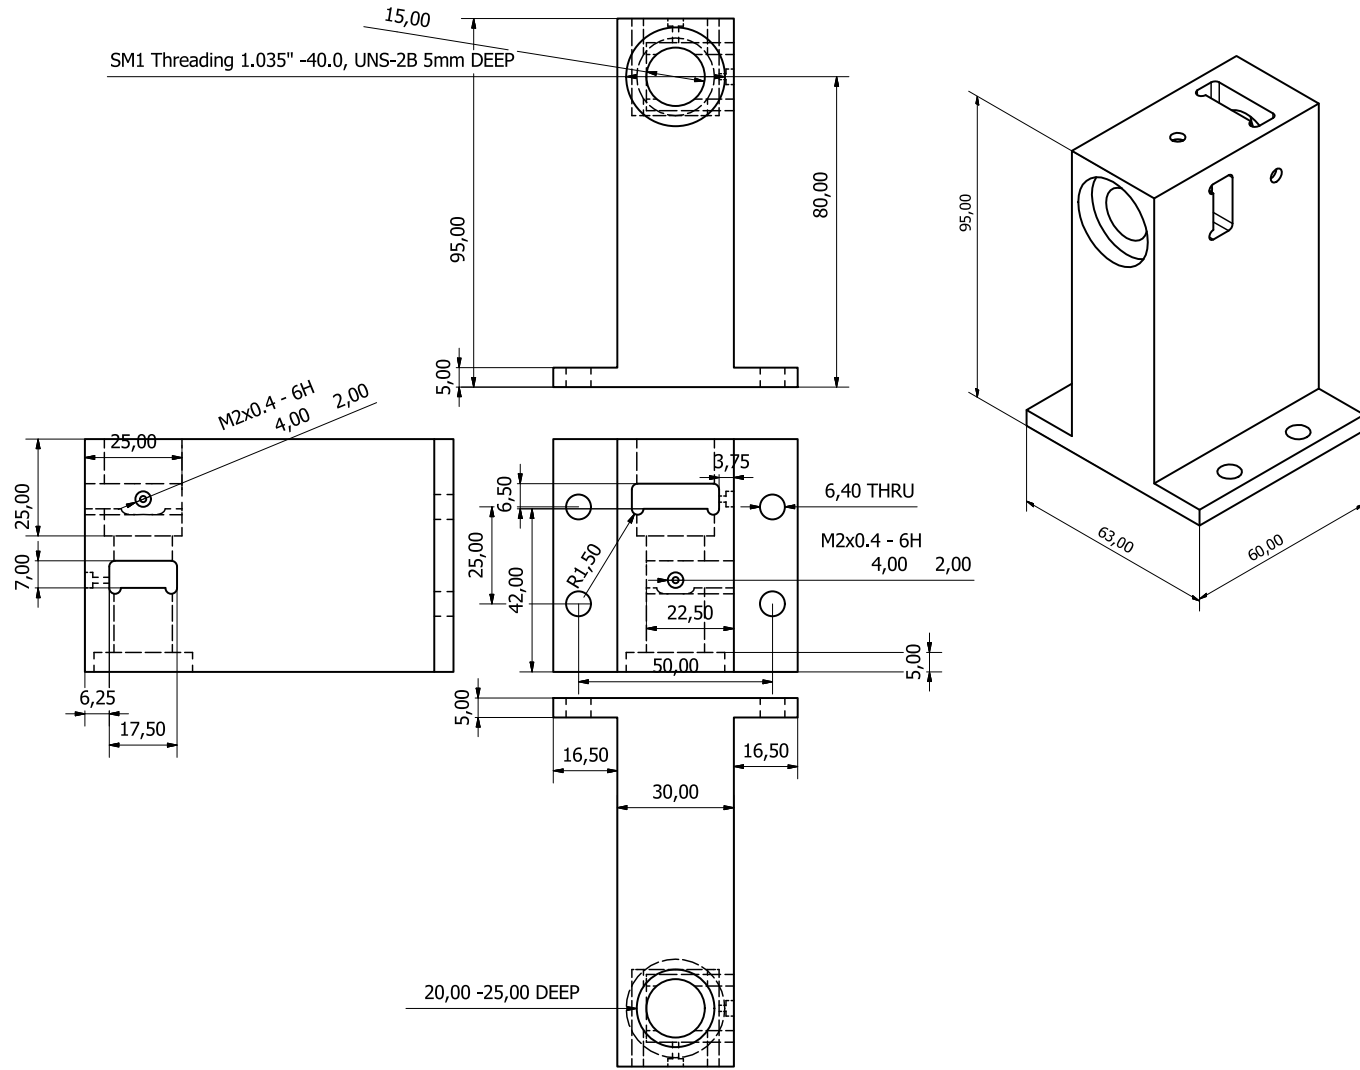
Technical drawing of the fibre launch, which holds two cylindrical lenses. Material: aluminium.
